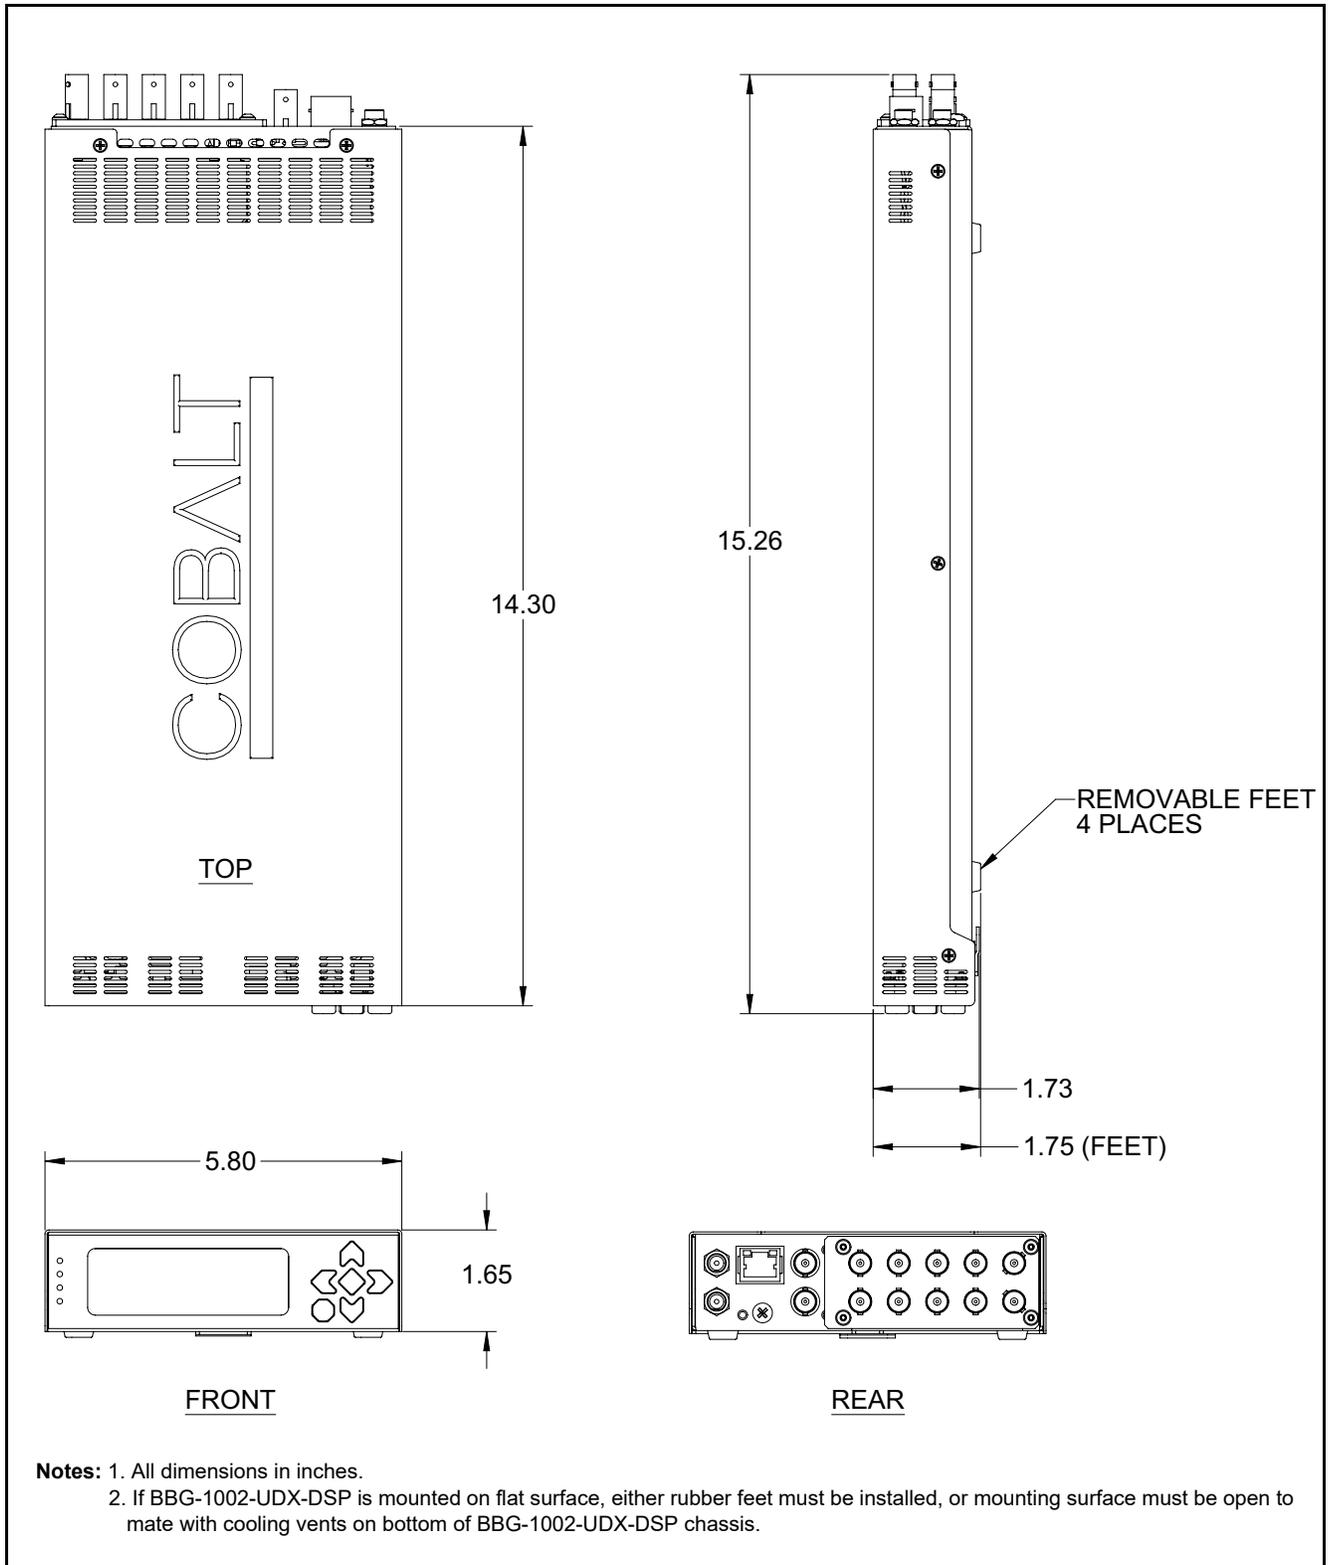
BBG-1002-UDX-DSP Dimensional Details
